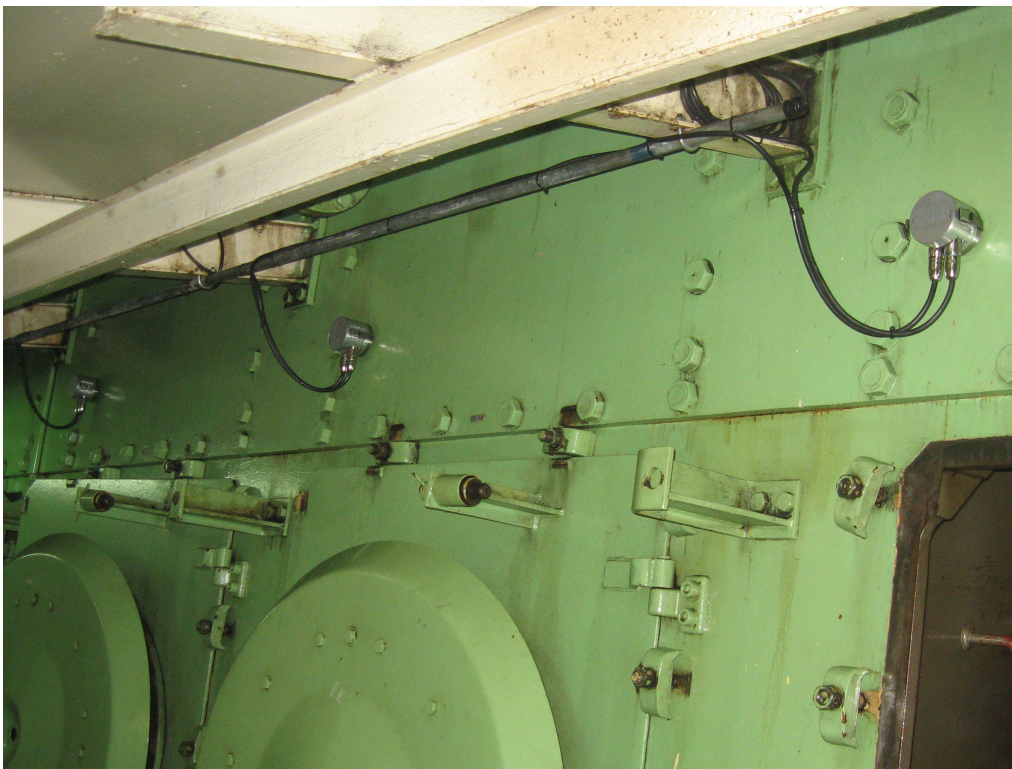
Installed Sensor of SiCOMS® System on a 2 stroke engine
